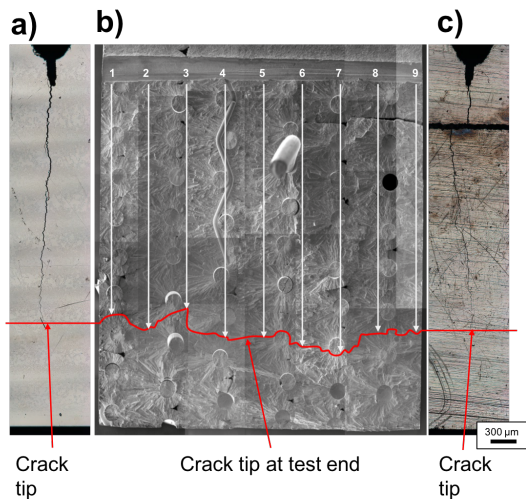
Crack length measurement of typically J_Q sample (specimen No. 13):
